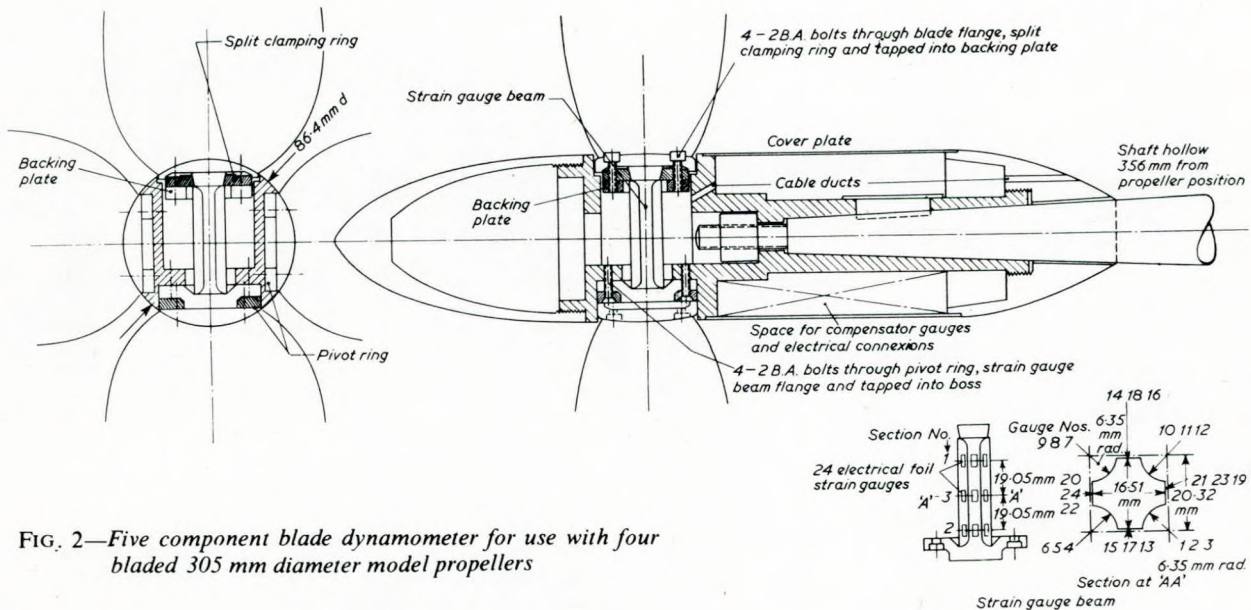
Five component blade dynamometer for use with four bladed 305 mm diameter model propellers
